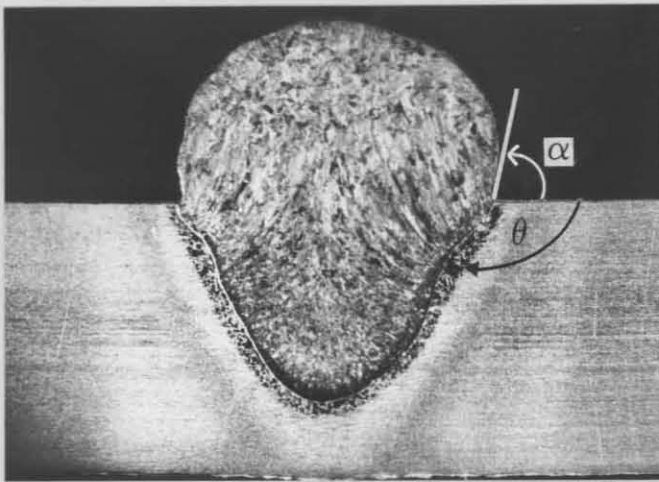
Weld bead details of bead-on-plate welded test specimen. Note the coarse grained HT HAZ adjacent to the fusion line.
